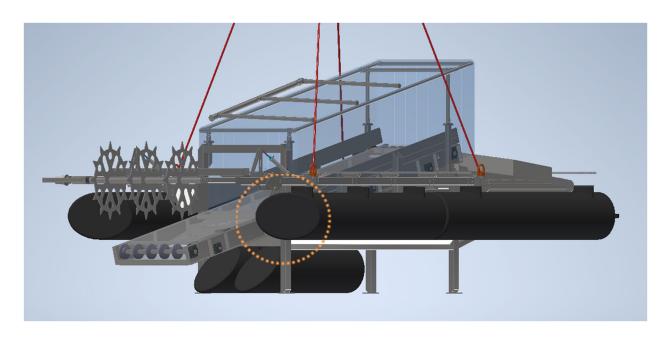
Angled view of BOWHEAD with outboard pontoon suggested change (circled).
